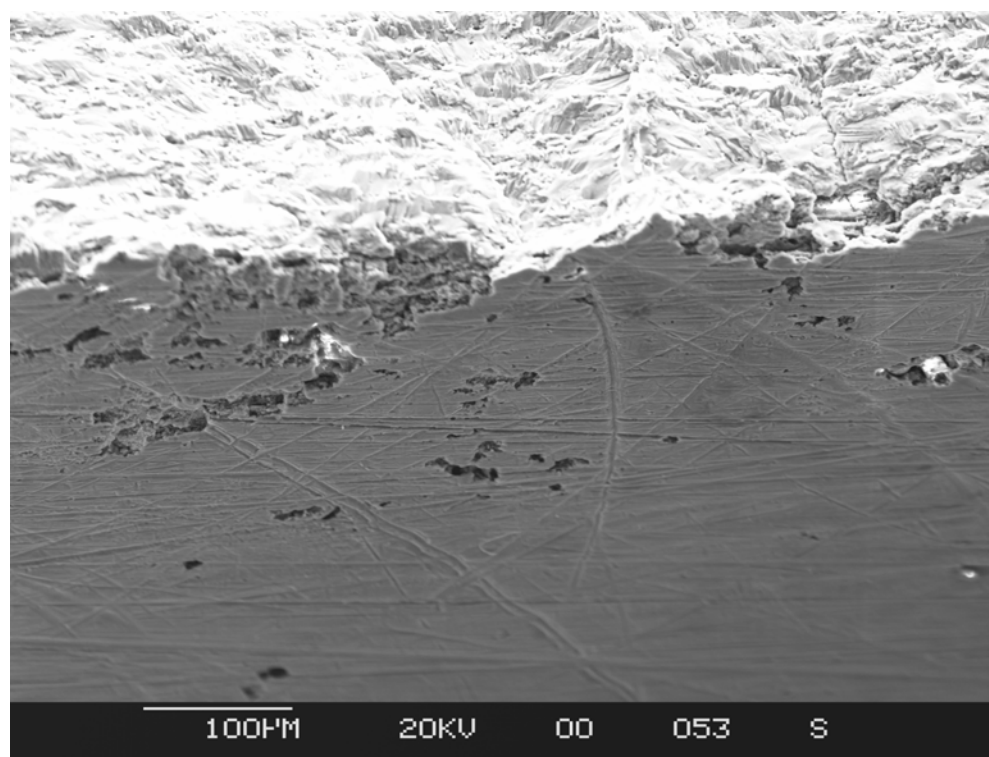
Surface View of Crack Origin A (Fig. B-34) on Specimen 5877.
